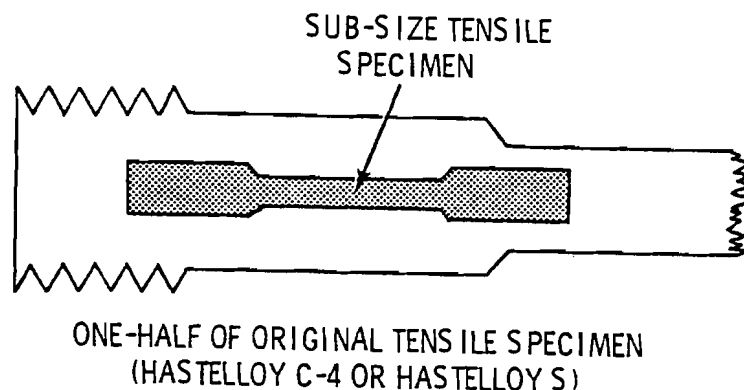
Subsize Tensile Specimens to be Machined from Sections of Tested Specimens
